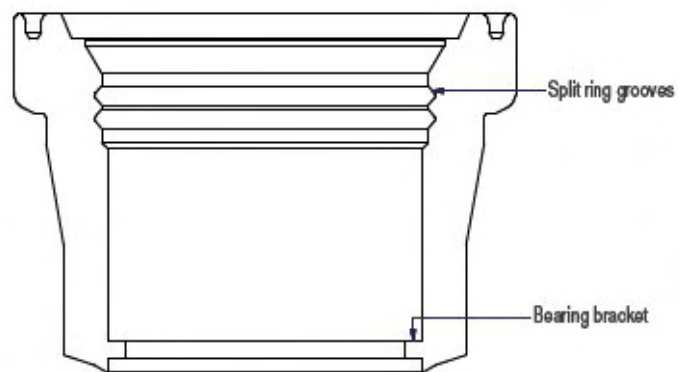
Tee neck with split ring grooves and bearing bracket
